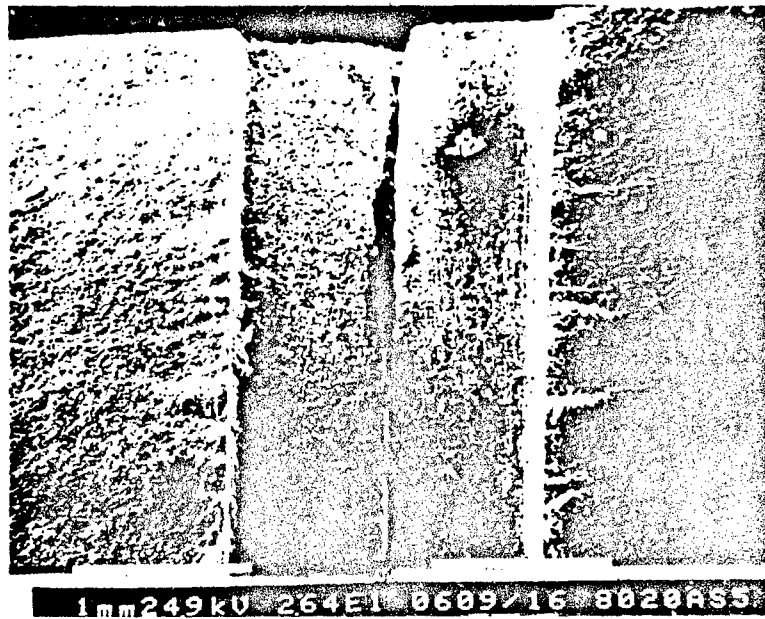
Fracture surface of a 20 vol% MoSi₂ composite -- as sintered
